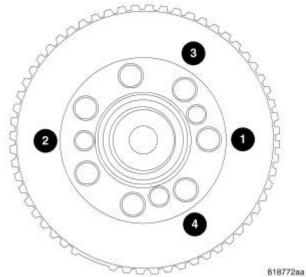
Target Wheel Tightening Sequence Courtesy of CHRYSLER GROUP, LLC
